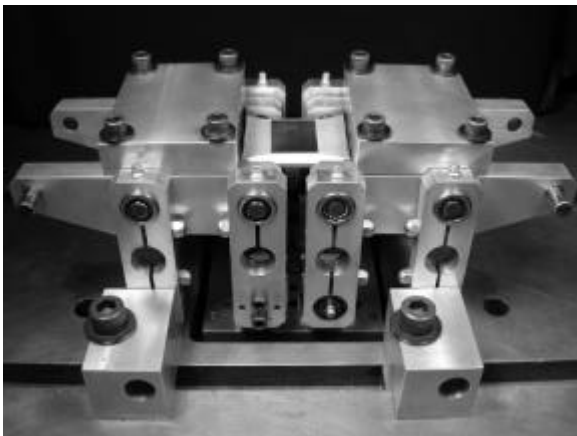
Photo of LPB friction stir welded fatigue specimen in 4-point bend fatigue fixture.
